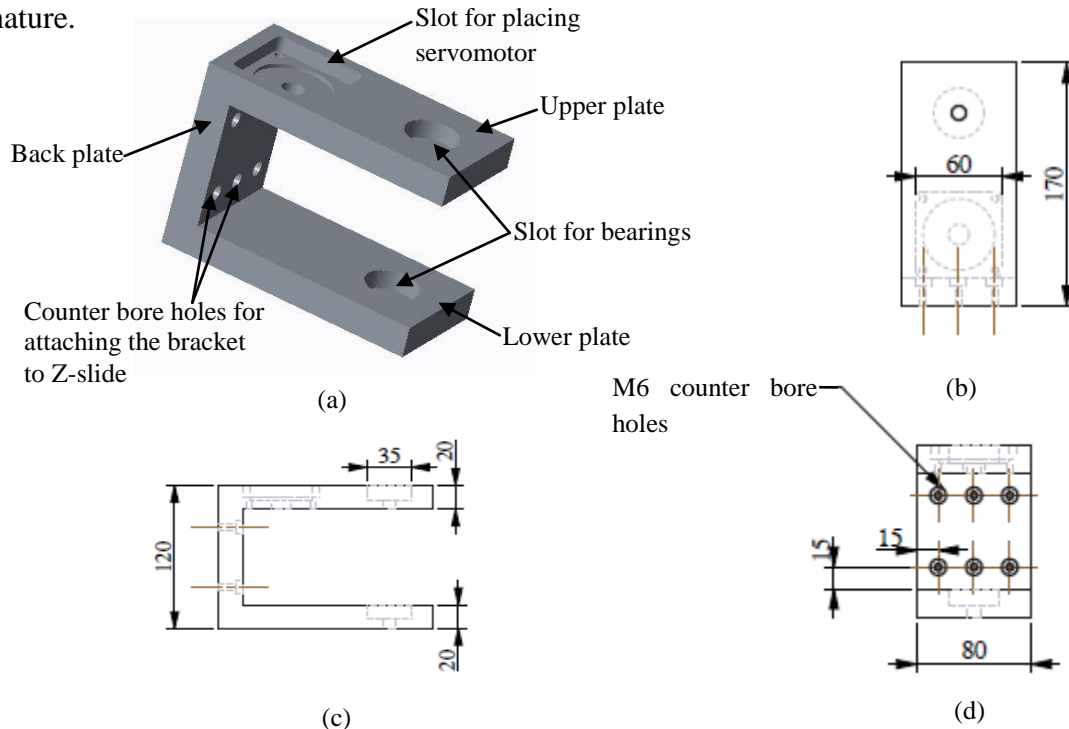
(a) Three-dimensional computer-aided design model, (b) top view, (c) side view and (d) front view drawing of the C-shaped bracket used for holding the magnetorheological honing tool as well as a servomotor.
